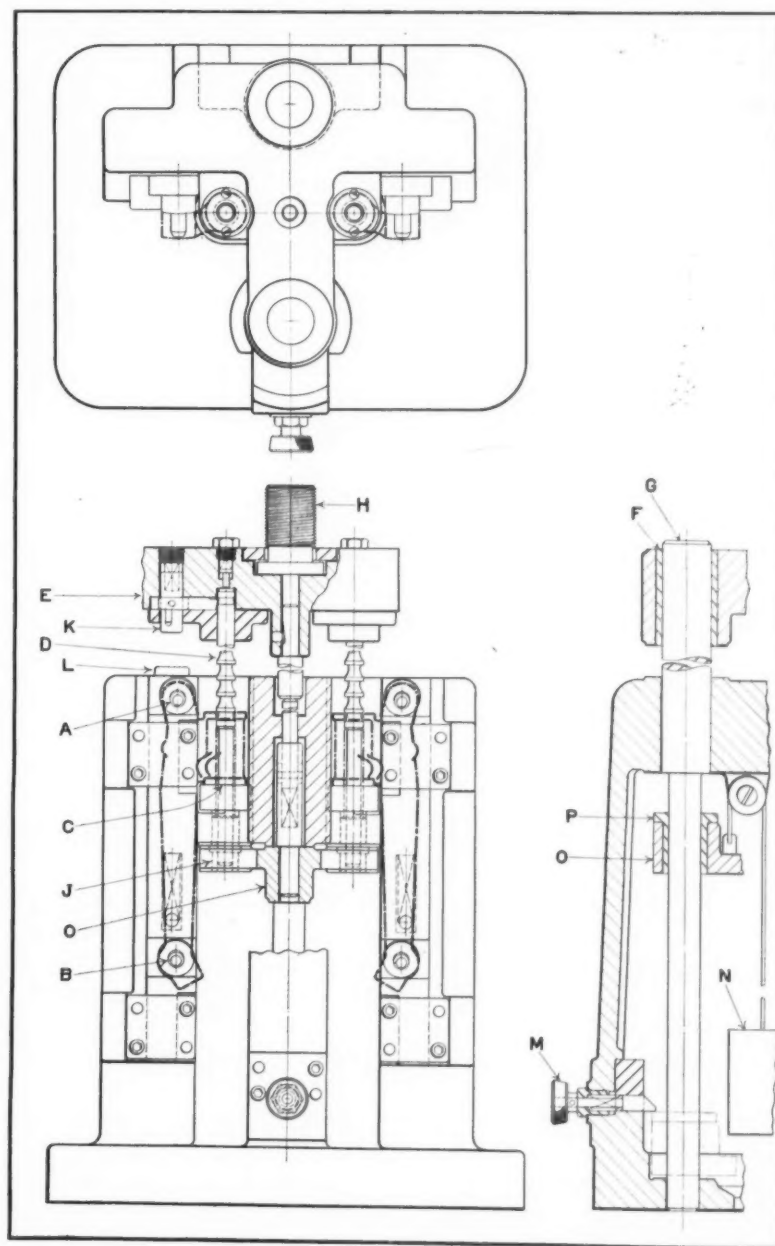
Details of Fixture Shown in Fig. 1, Designed for Broaching the King-pin Hole in Steering-knuckle Supports
